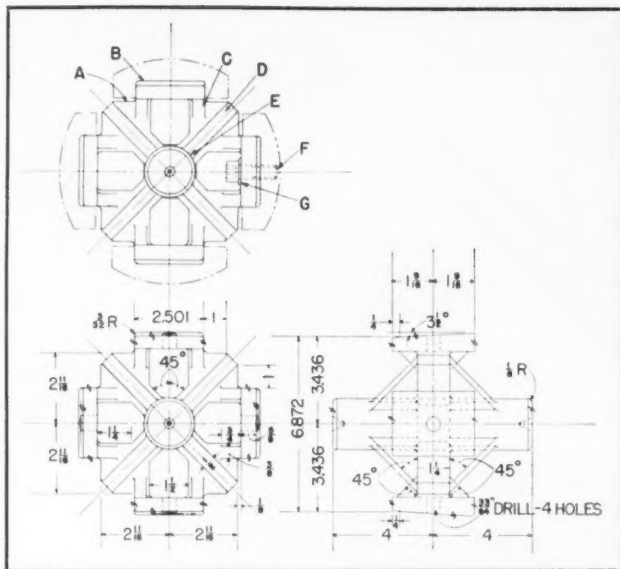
Sketch of lathe arbor fixture designed to accommodate four eccentric shaft wedges of the design shown in Fig. 1 for turning and finish grinding
